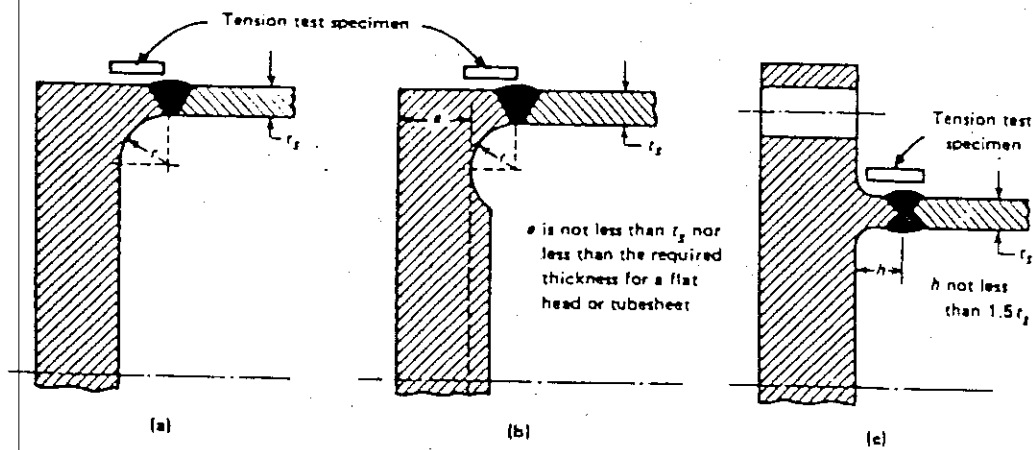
ATTACHMENT OF PRESSURE PARTS TO FLAT PLATES TO FORM A CORNER JOINT (CONT'D)
